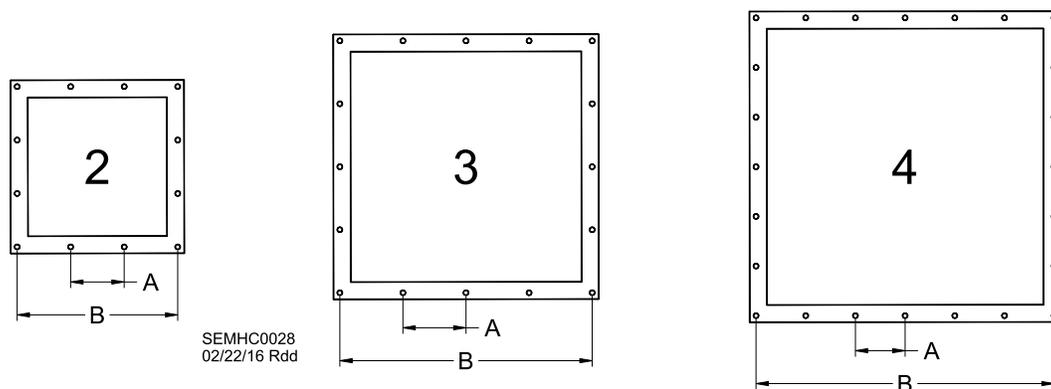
& Table 8 – Head discharge bolt hole patterns, quantities & spacing
